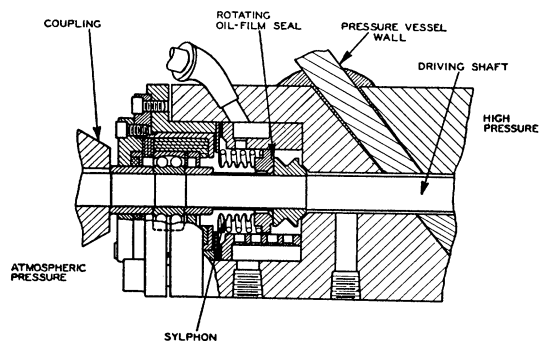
Rotary oil film seal on driving shafts for the fabric belts.
